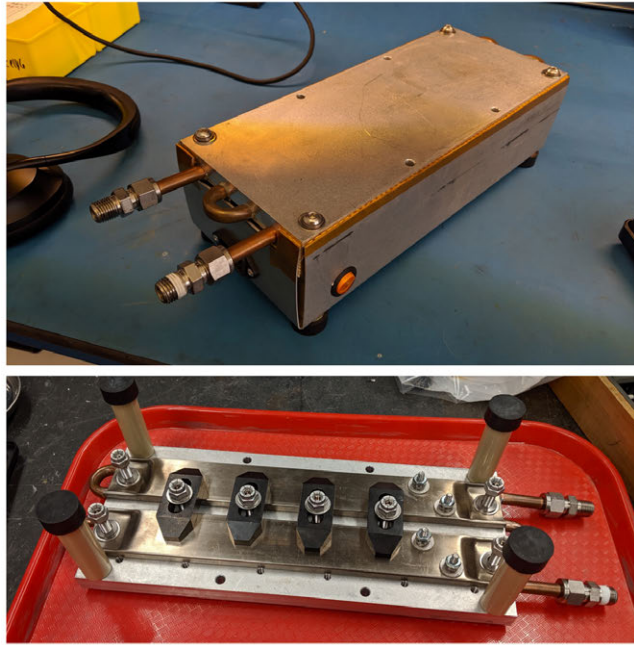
Custom build liquid-cooled hot plate for rapid cool down after soldering battery cells.
